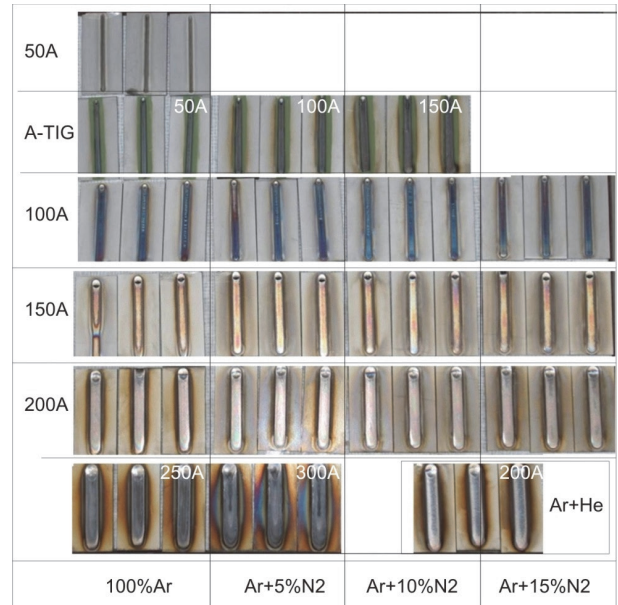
The TIG welded surface of stainless steel S82441 (3 samples for each variant) in as welded condition
